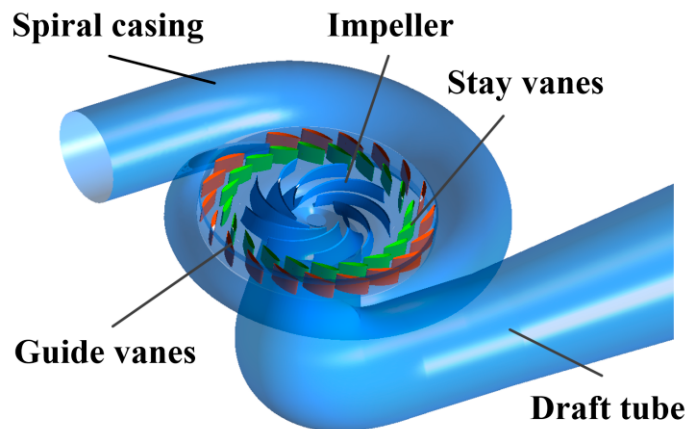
The full-passage geometric configuration of the model pump-turbine.
